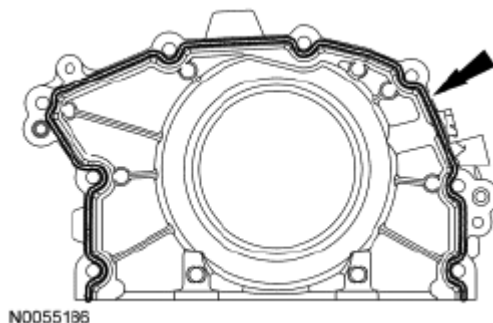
Applying Bead Of Motorcraft High Performance Engine RTV Silicone To Sealing Surface Of Crankshaft Rear Seal Retainer
